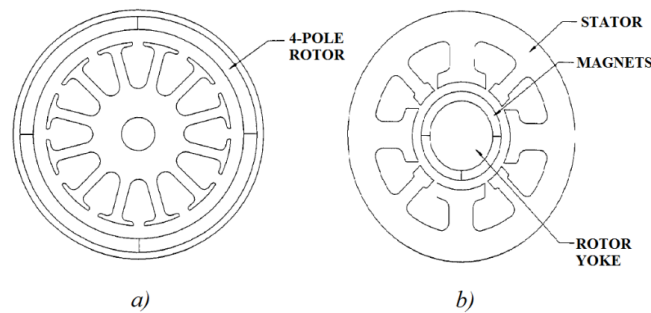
The two BLDC motor configurations: a) outer rotor BLDC motor b) inner rotor BLDC motor. [23]
